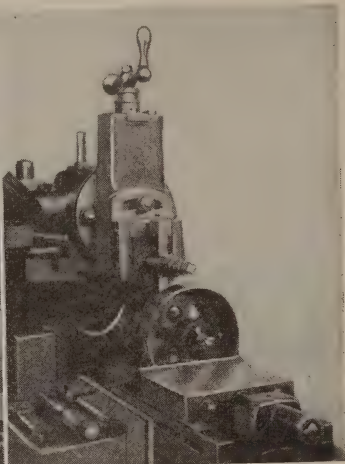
Planing a keyway in a pulley. (The pulley is held in a milling vise gripped in the shaper vise.)
